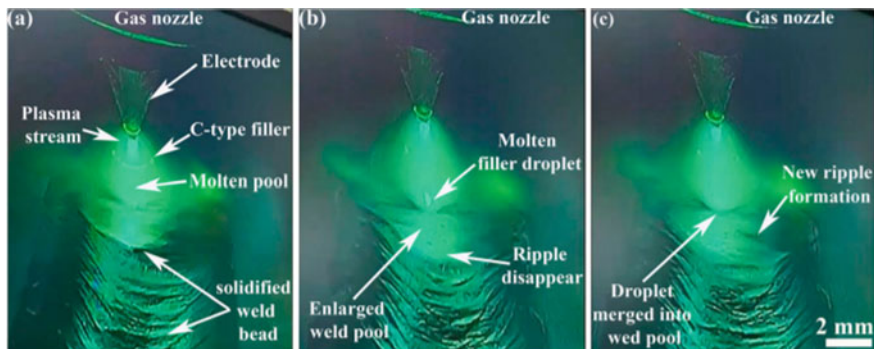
Schematic diagram of bridging metal transfer: a droplet formation from C-type filler material; b droplet traveling toward weld pool; c droplet detachment on the molten pool [11]
